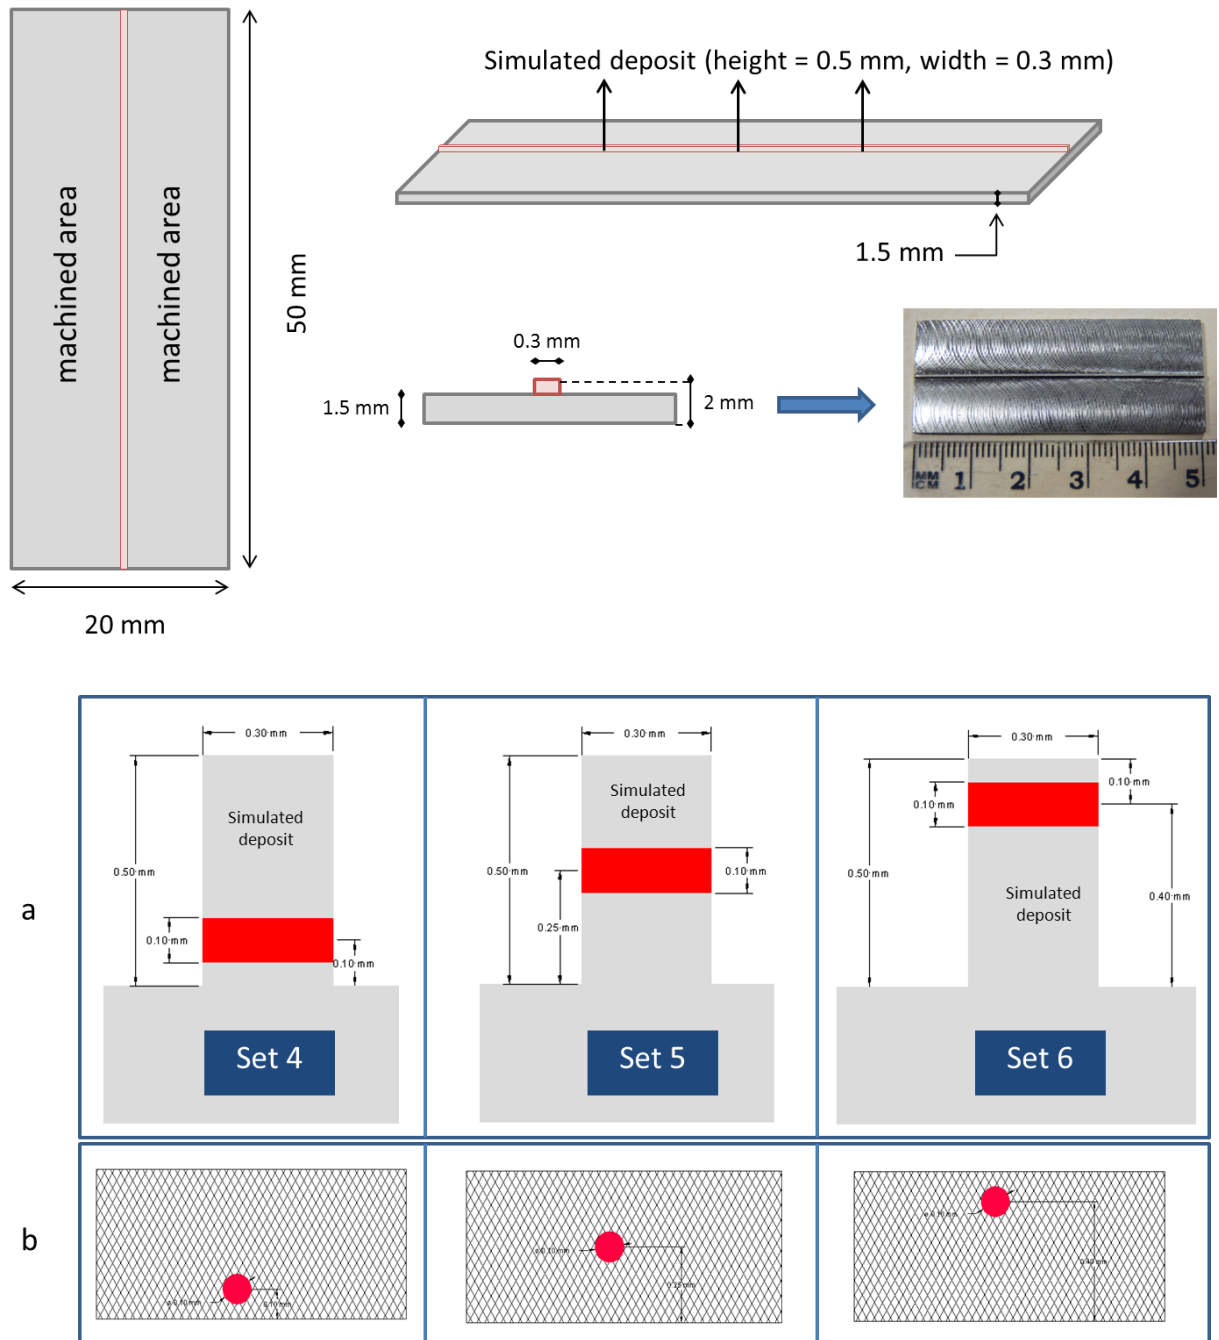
Overall dimensions, cross sectional view (a) and side view (b) of the simulated deposit showing the various positions of the 100 microns side drilled hole depending on the set number.
